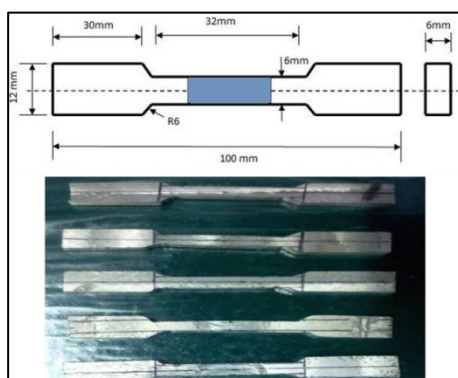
Tensile test samples of required dimension as per ASTM E-08
